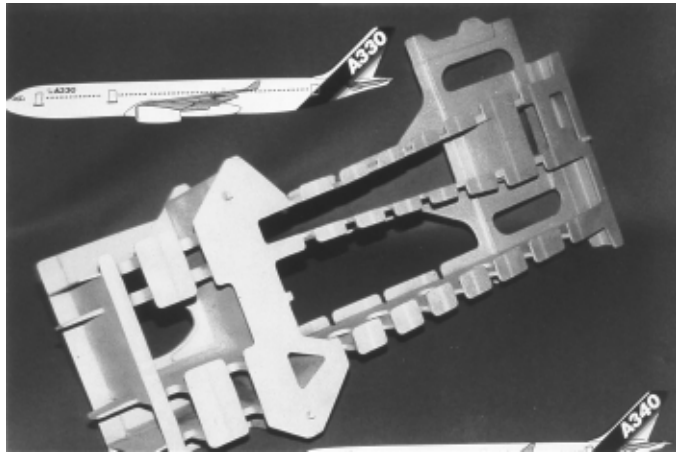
Thixoformed A356.0-T6 inner turbo frame for the Airbus family of aircraft
